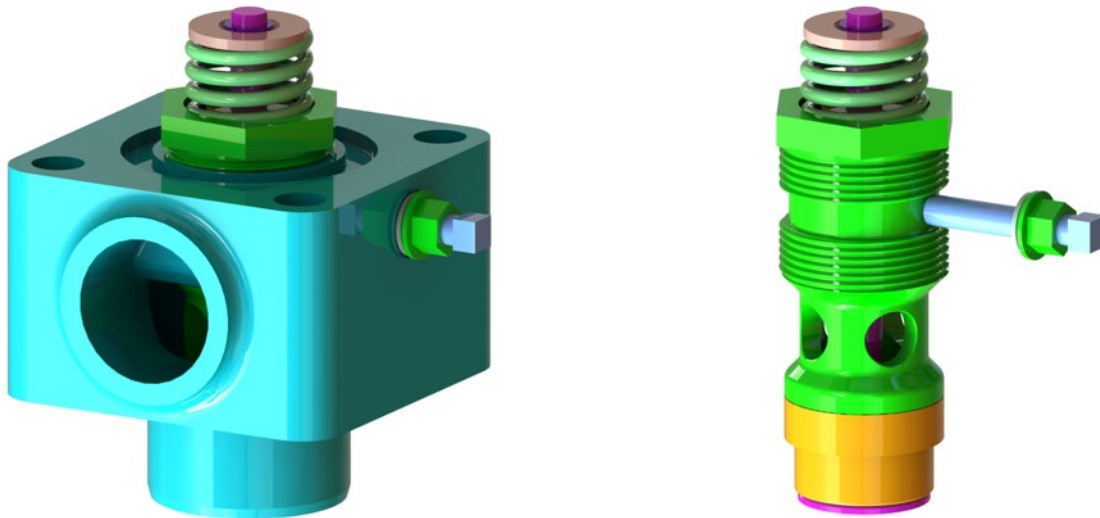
The comparable DI valve and housing geometry provided by Baker Hughes, a GE Company and assembled (left). The valve component is shown on the right with the external housing (blue) removed for clarity.
